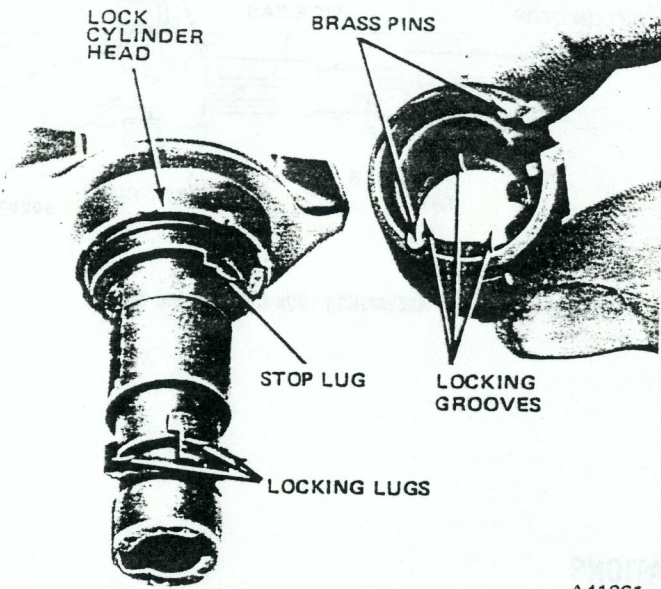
J-66 Lock Cylinder and Sleeve Disassembled
